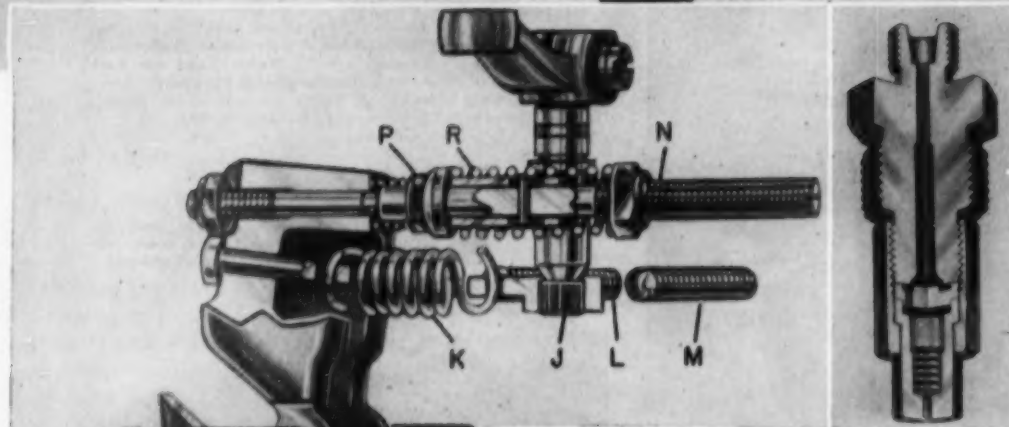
Cross-section of new type screw-in holder and outwardly opening poppet nozzle.
